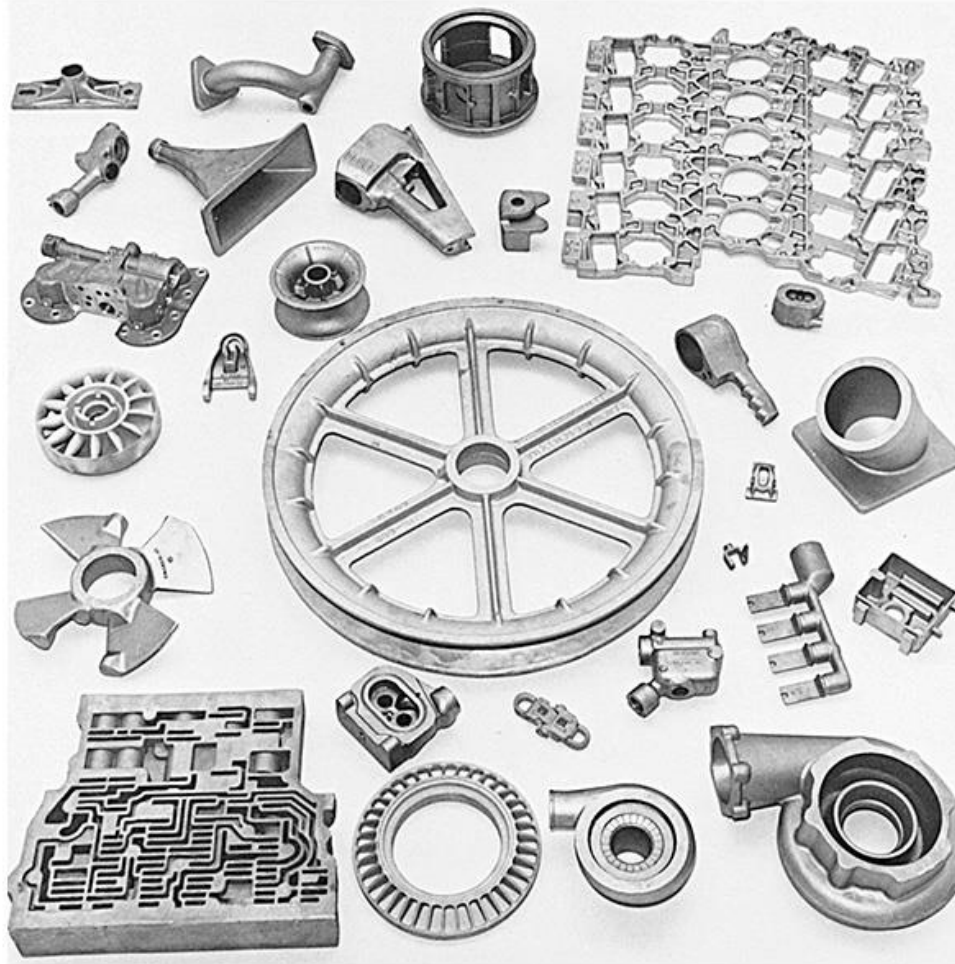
A variety of sand cast aluminum parts. (Courtesy of Bodine Aluminum Inc., St. Louis, MO)
